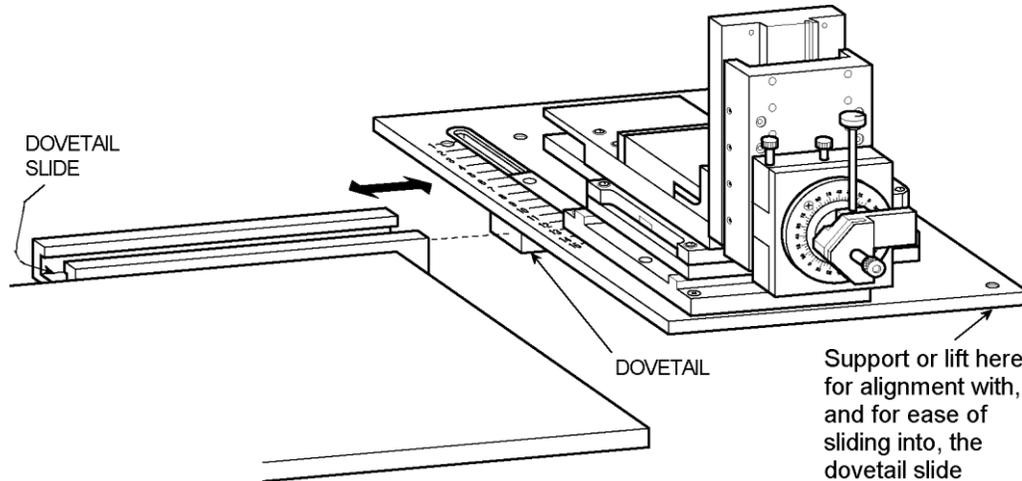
Engaging the manipulator base plate in the microscope adaptor.
